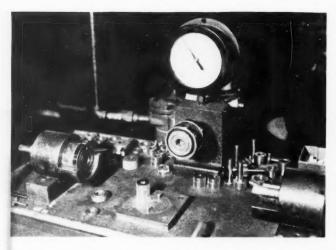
Checking ground holes by means of special air gage testing unit.
